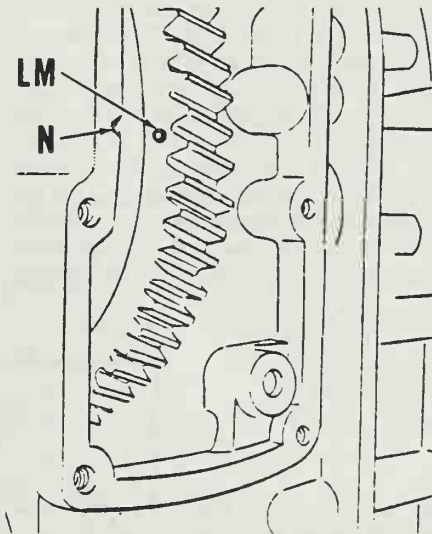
View of large camshaft gear timing mark (LM) and crankcase notch (N) on Models WD1-660, WD1-670 and WD1-750.
